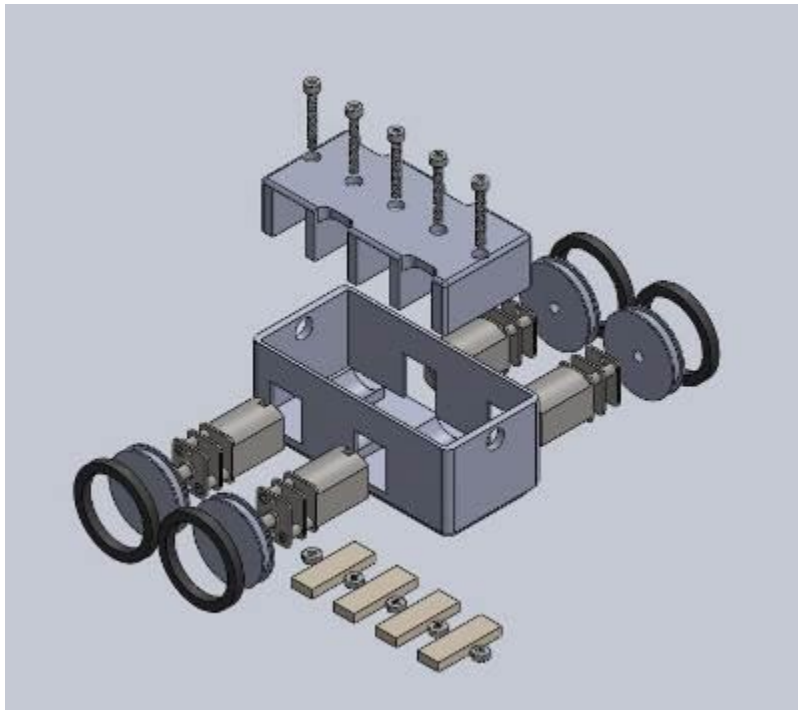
Components of the modified inspection tool using the new motors with metal 298:1 gearbox.
